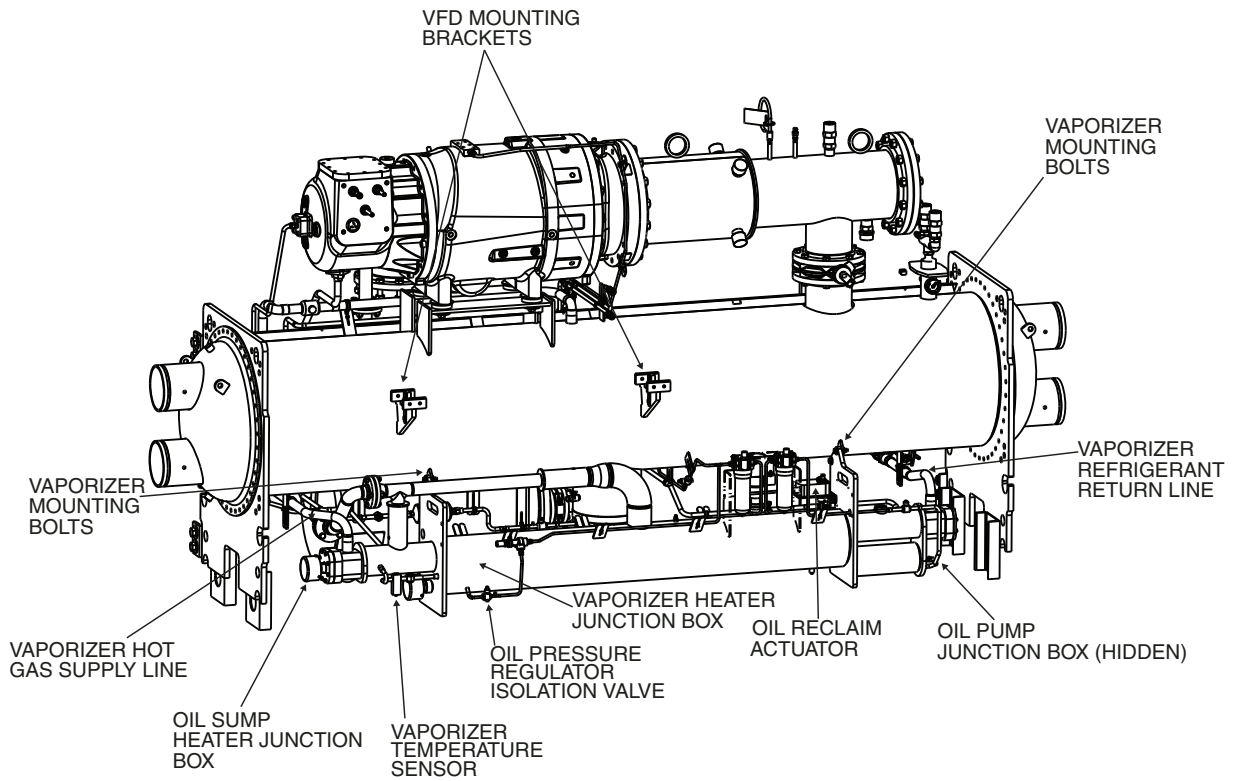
Oil Concentrator Removal, Q and R Compressors (Unit with R Compressor Shown)
